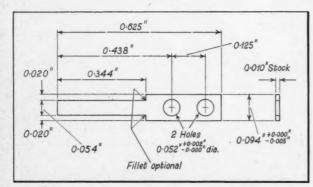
From this drawing of the part, the draughtsman estimates the magnification needed to enable the parts to be produced within the specified tolerances
